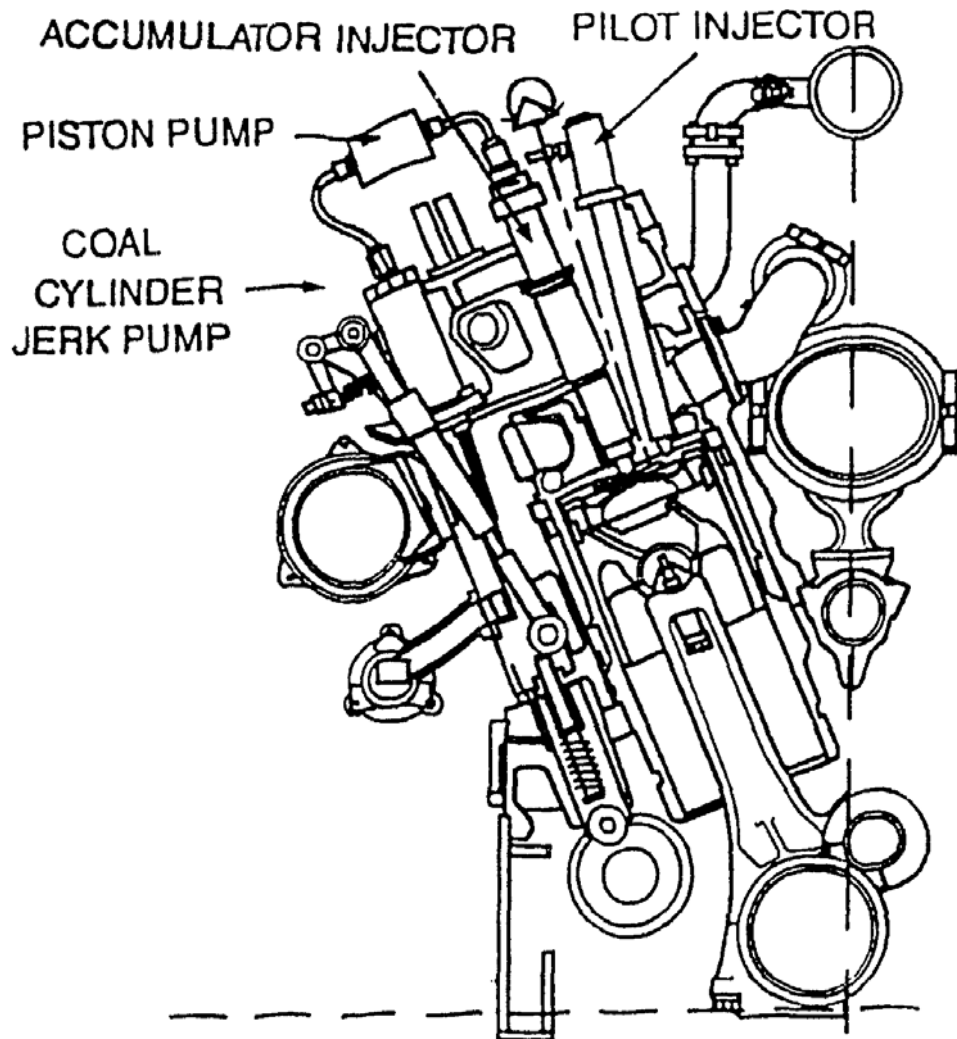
Section through the modified GE-7FDL diesel engine, a piston pump provided pumping and metering force to the CWF
